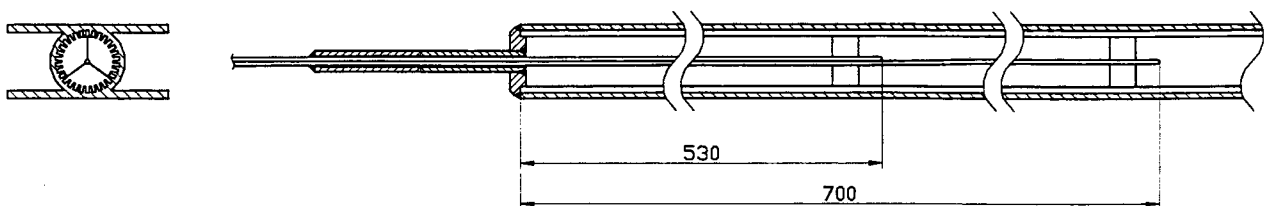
Fixation of vapor space thermocouples inside the heat pipe container
